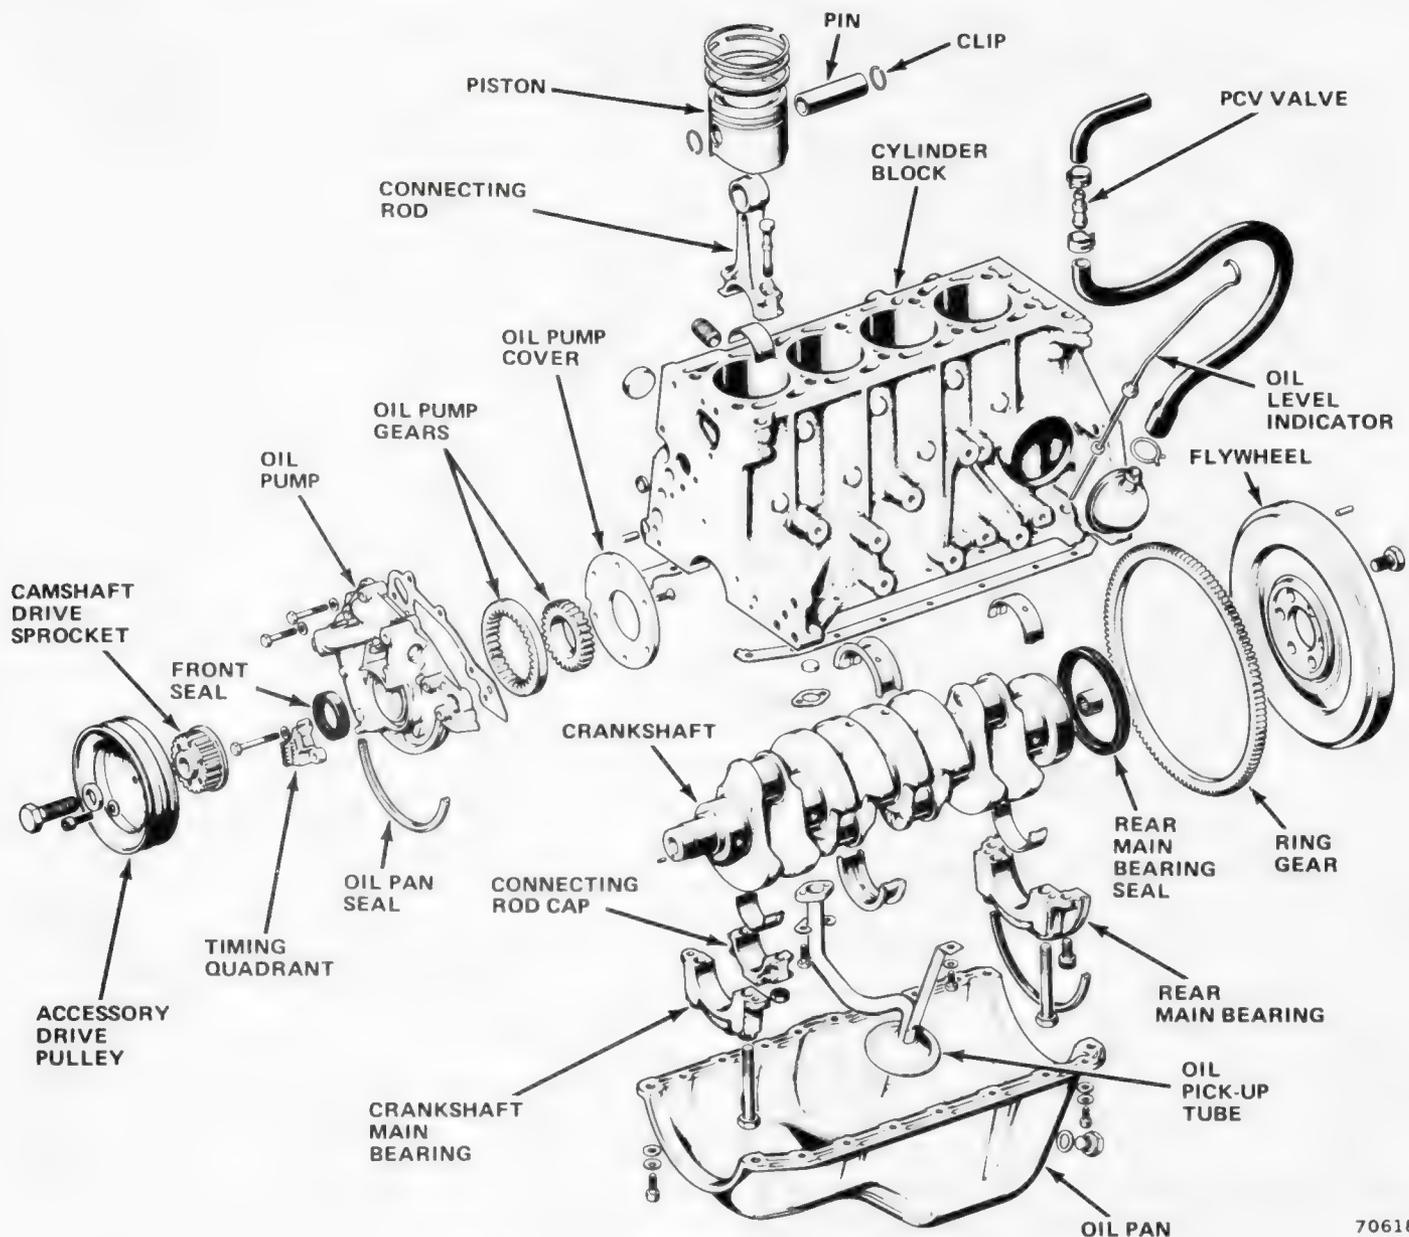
B-2 Four-Cylinder Engine Assembly—Block
